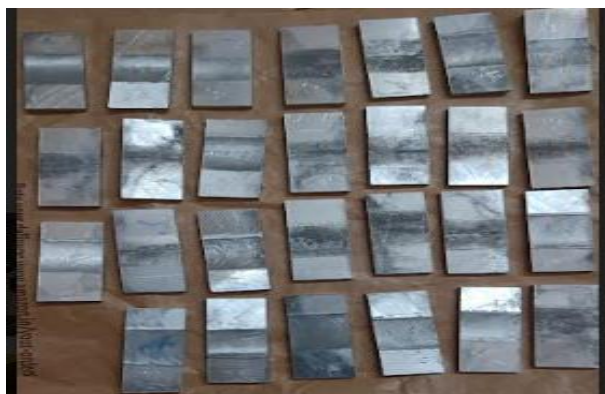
Photograph of fabricated Friction Stir welded hardness test specimens
